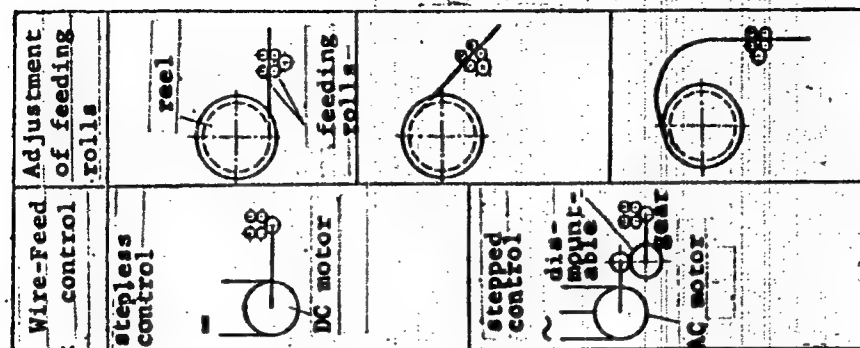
, c. Variants of accessories for TsnITMASh-designed standardized semiautomatic welding machines
